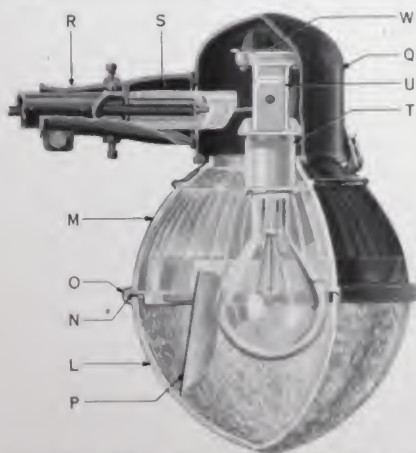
Cutaway view of a Form 79-R luminaire with heat-insulated slip-fitter hood, series socket and wet-process-porcelain receptacle and spun-sealed assembly of silvered-glass reflector and rippled lateral-bowl refractor
